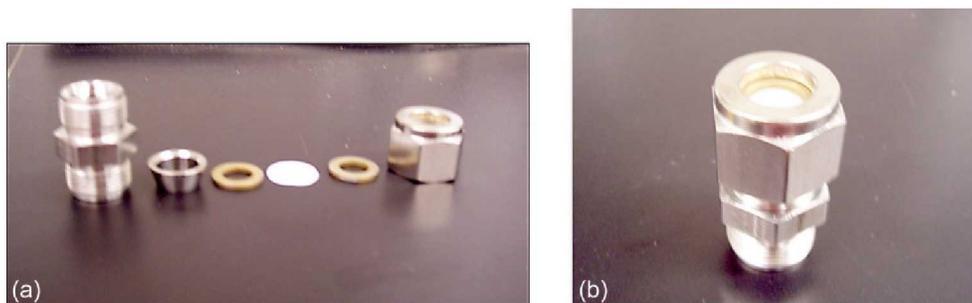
(a) Parts of separator clamping device. (b) The assembled device.
